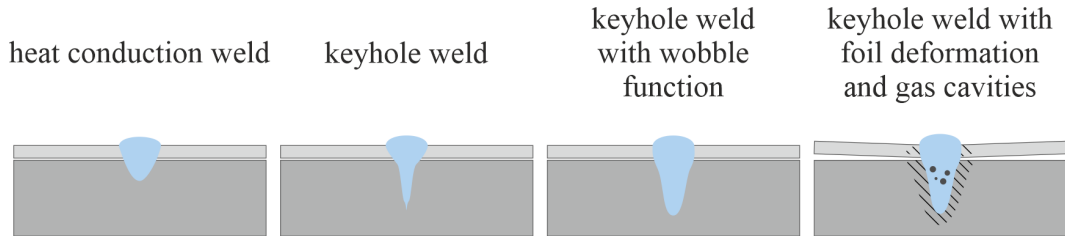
Illustrations of weld seam profiles of thin metal foils welded onto a metal substrate, depending on the welding method. Classic heat conduction welding leads to shallow weld seams, while keyhole welding results in deep, narrow penetration of the material. Implementation of a wobble function increases fusion zone width of a keyhole weld. Possible defects are entrapped gas cavities, leading to weld seam porosity, as well as foil deformation due to thermal stresses. A qualitative indication of the HAZ is displayed as hatched area.
